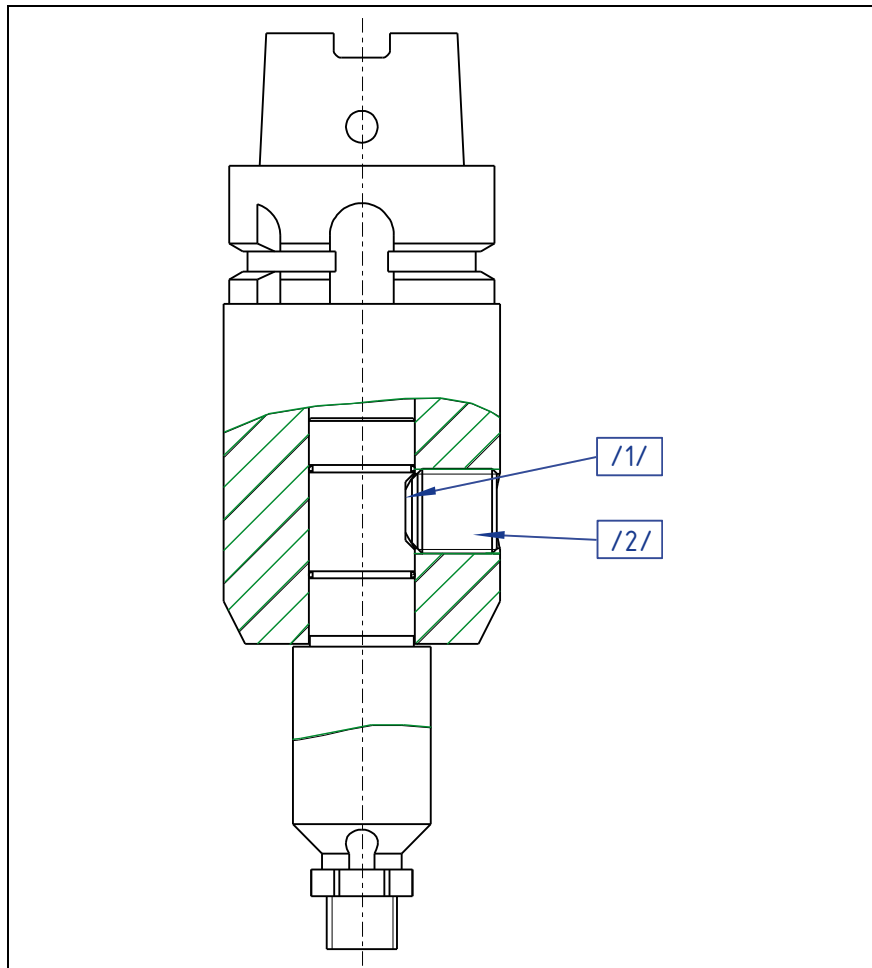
Sectional view of the GSW-V clamped in the WELDON
